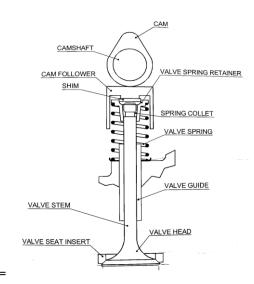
Transmission of camshafts and valves of the four-valve engine.
